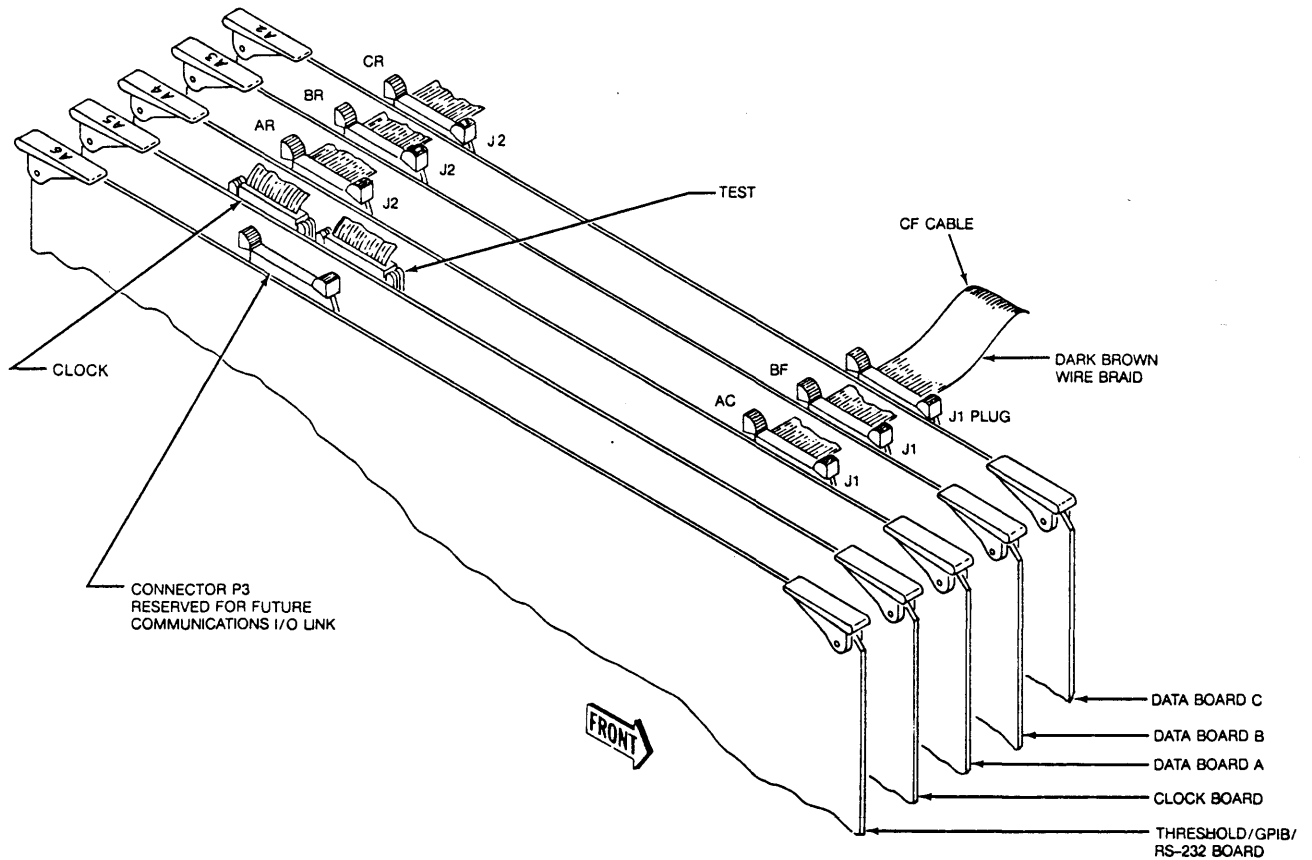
K450 Ribbon Cable Connections at Card Cage
